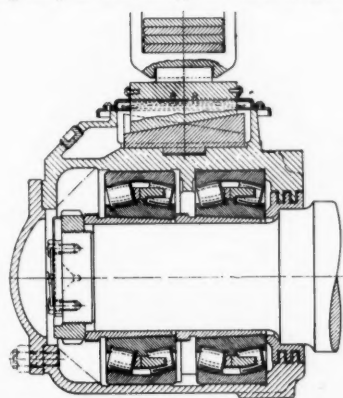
Locomotive truck axlebox with SKF spherical roller bearings
